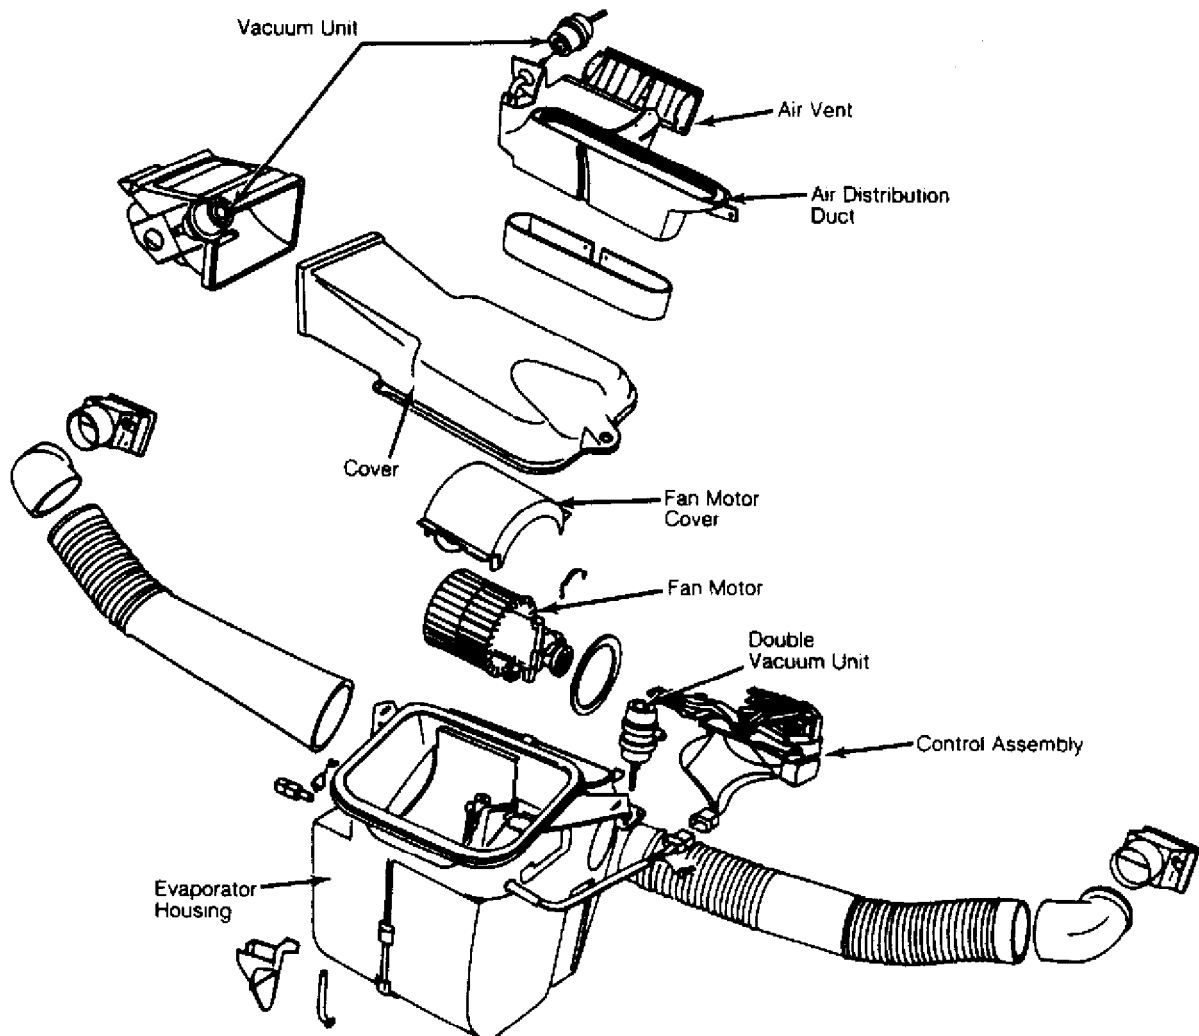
Exploded View of A/C-Heater System Components (Cabriolet)
